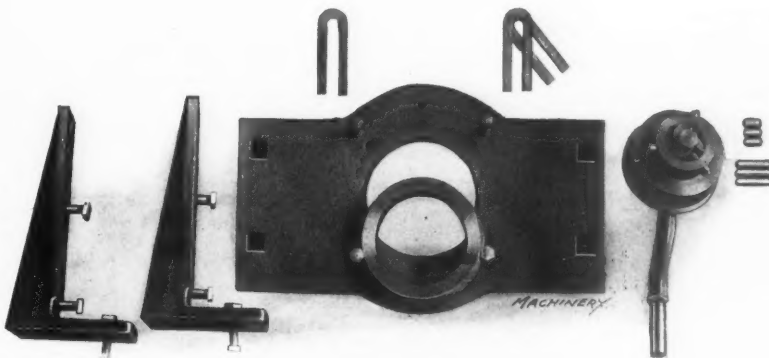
Angle-plate, Clamps, etc., for holding Work on Machine ready for grinding
